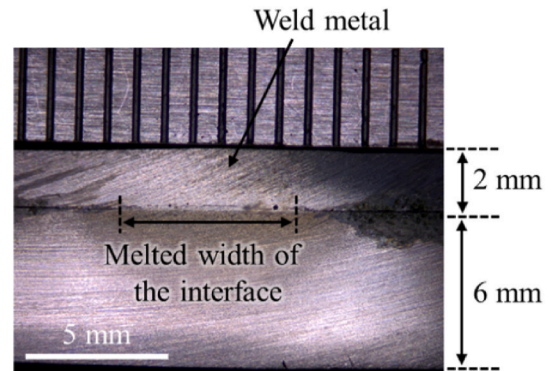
Cross-sectional macro at 34 s after the welding starts.
